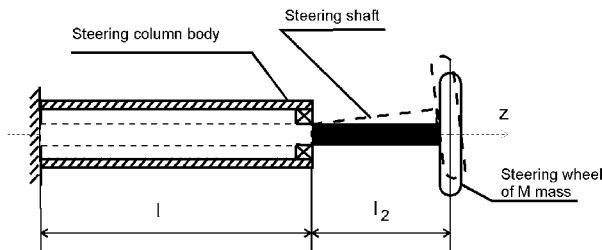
Mechanical scheme corresponding with the scheme of steering links – column, shaft and steering wheel connector
